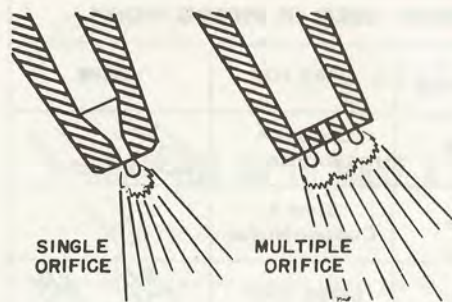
Brazing tips for acetylene torches have special drilling to give a spreading, wrapping flame that will heat a fairly large area.
